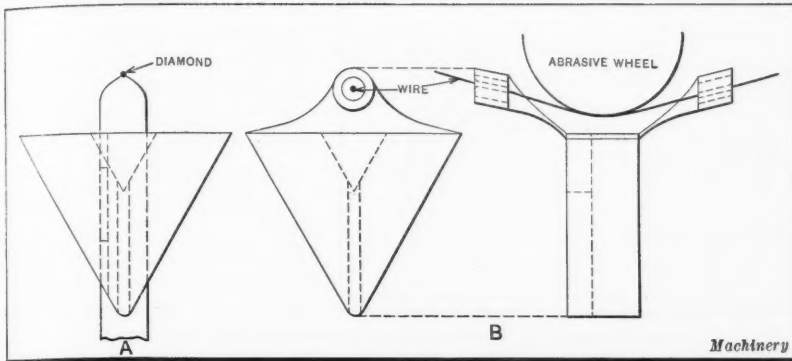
Equipment for forming Concave Groove in Periphery of Wheel for grinding Crest of Gage Thread
